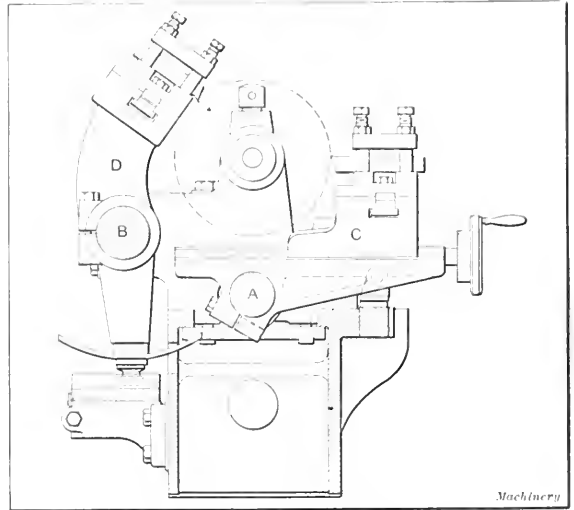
Cross-sectional View of Fay Automatic Lathe
